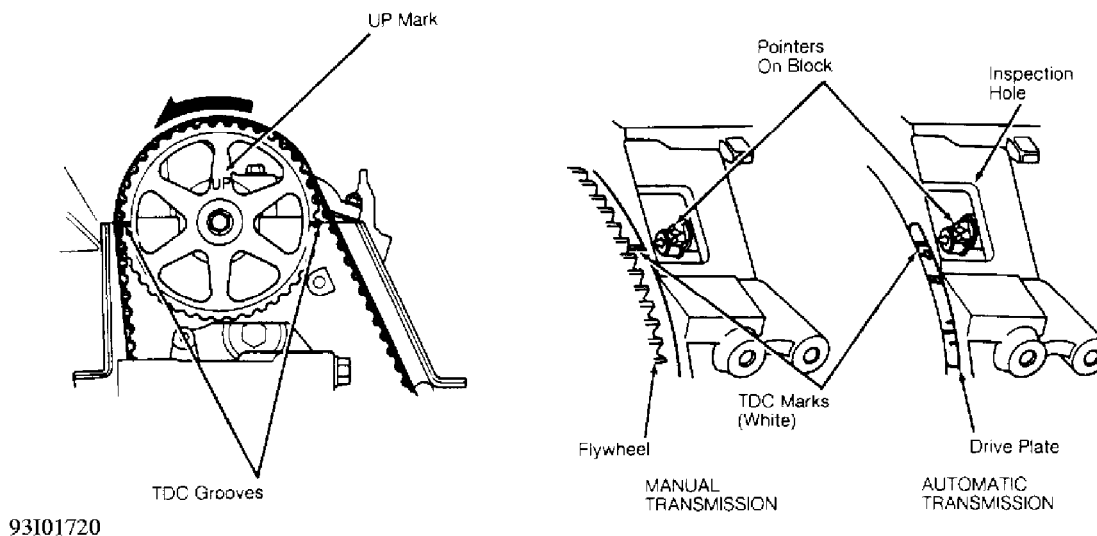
Positioning Camshaft Sprocket For Valve Adjustment (2.2L SOHC)
